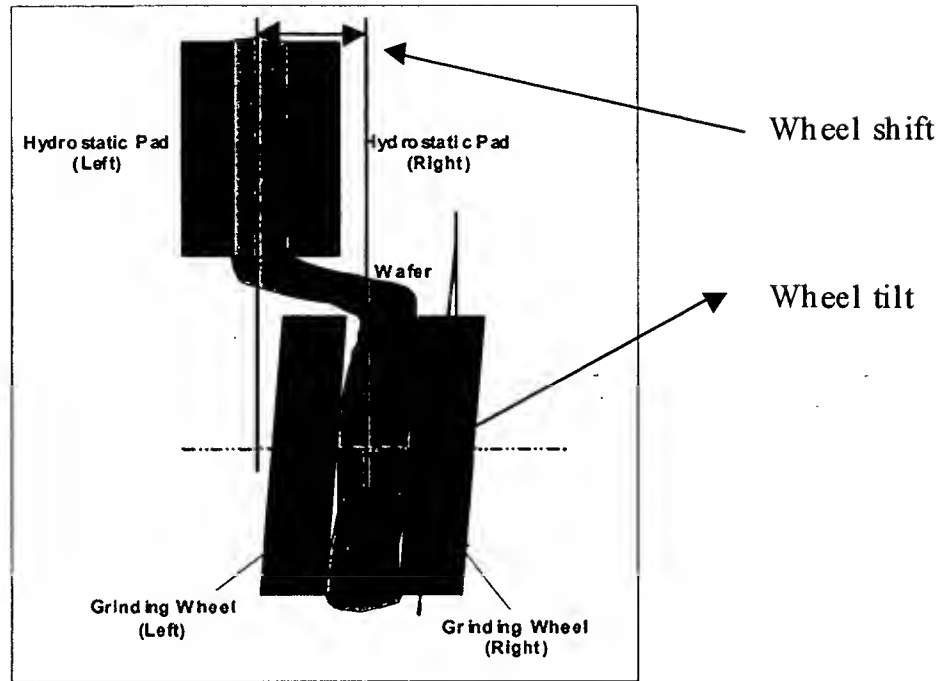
Misalignment between Clamping Plane and Grinding Surface.
